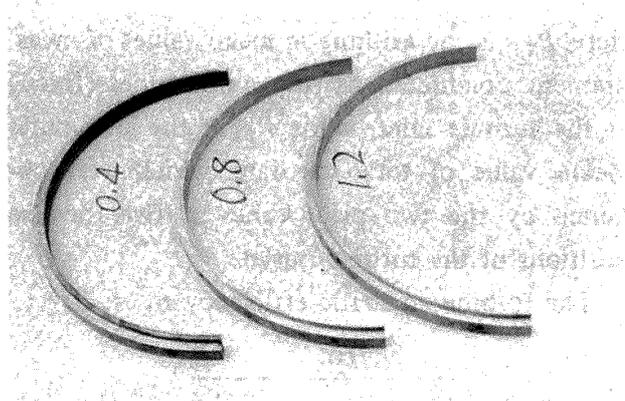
Different rotor blade shroud rings and dimensions of blade tip-clearance
